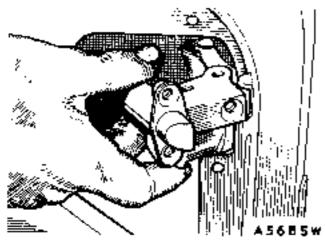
Withdrawing the door lock from the inside of the door frame
